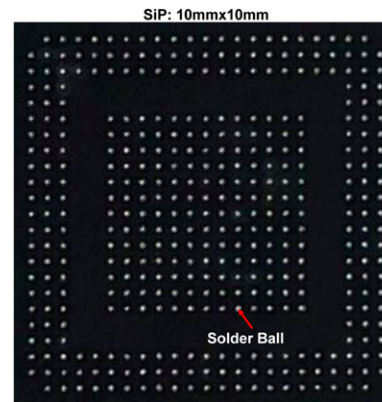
Bottom view of the individual SiP showing the solder ball distribution.
